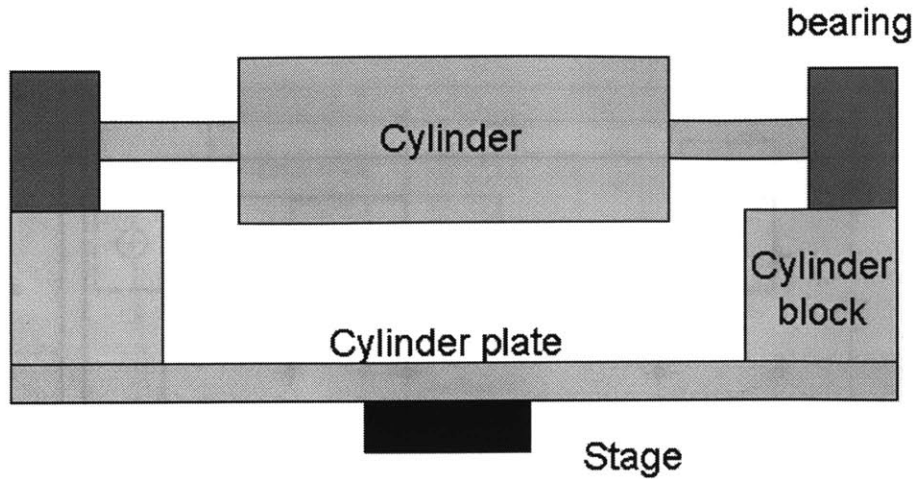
D: Cylinder subassembly with one stage (front view)
